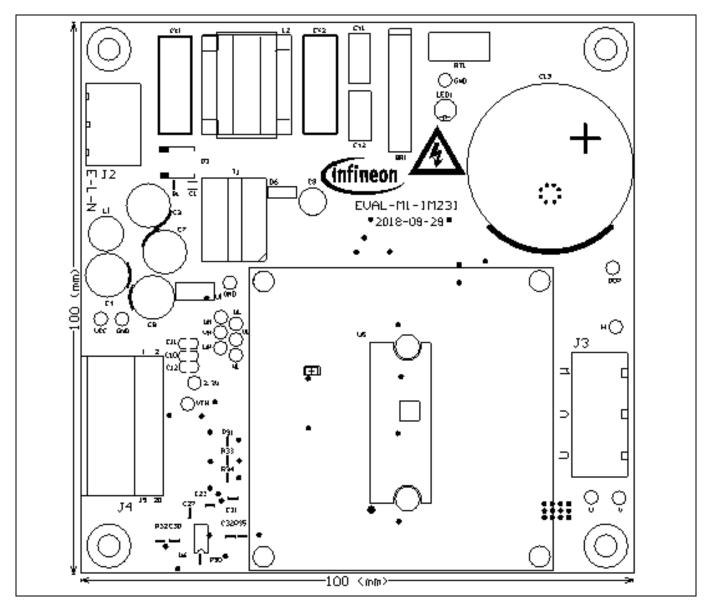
Top assembly print of the EVAL-M1-IM231-A evaluation board
